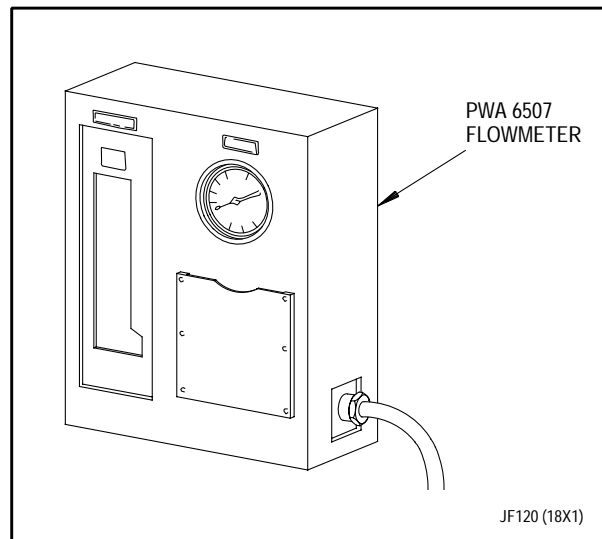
No. 1 Bearing Seal Assembly - Air Leak Check (Sheet 5 of 5)
